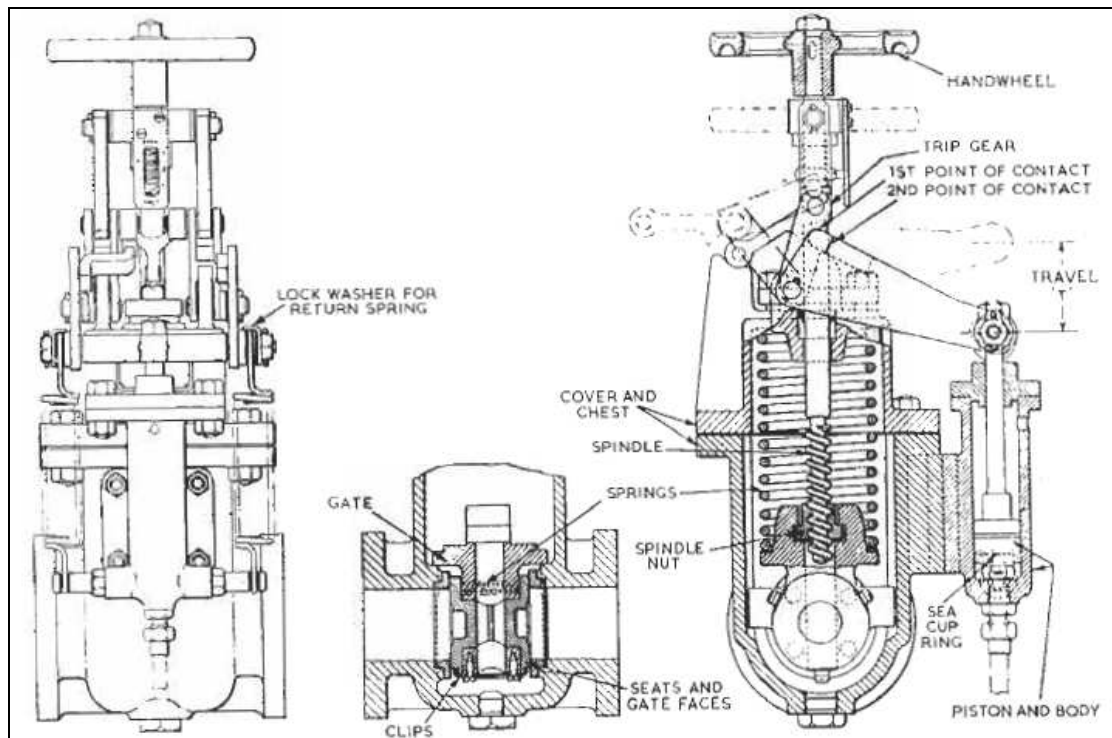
Quick-closing valve – hydraulically operated.
